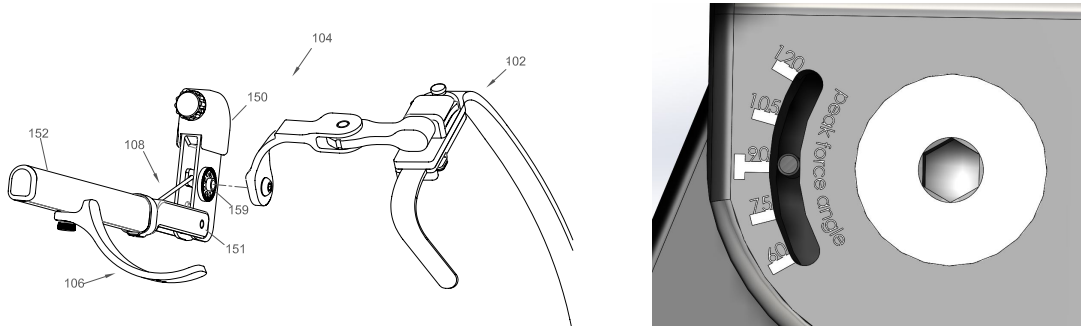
Offset adjustment mechanism (a) and indicator (b).
